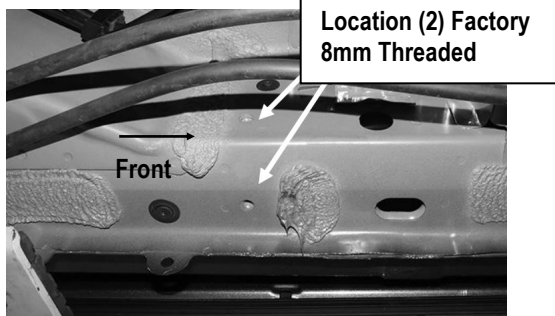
Driver Front Mounting Bracket (DFM) Installation
